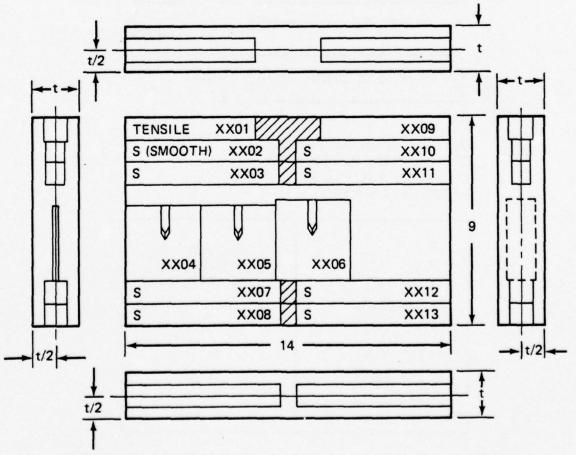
6.7-Inch-Thick Forging for Specimens XX01 Through XX13.
